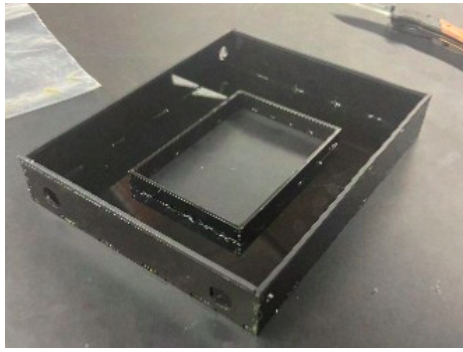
Final Acrylic Laser Cut Incubator Housing
